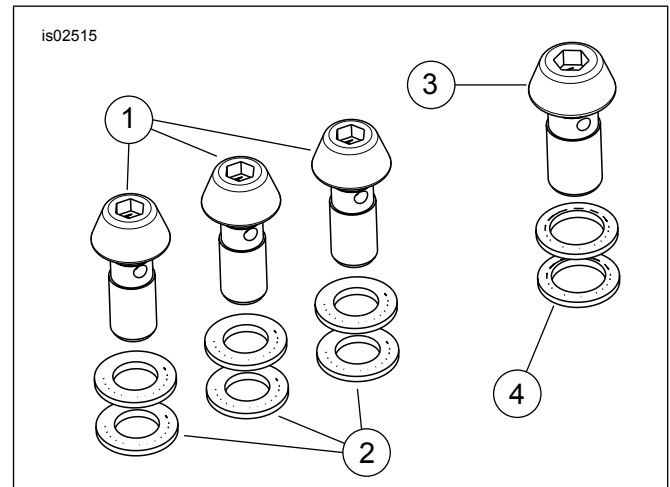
Service Parts: Chrome Banjo Bolt Kit
